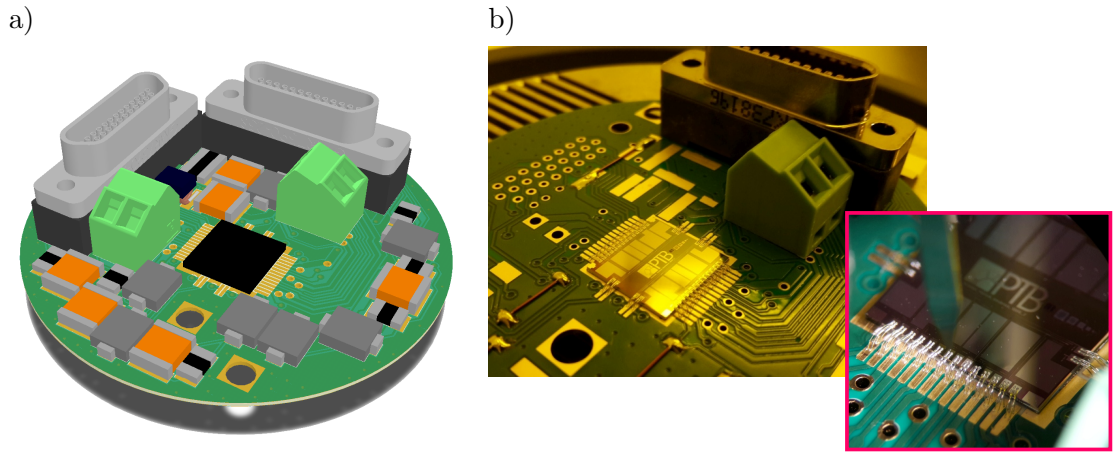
PCB design and wire bonding. Fig. a) shows a CAD drawing of the fully equipped PCB. In b), we see the chip after it was wire bonded to the PCB.
